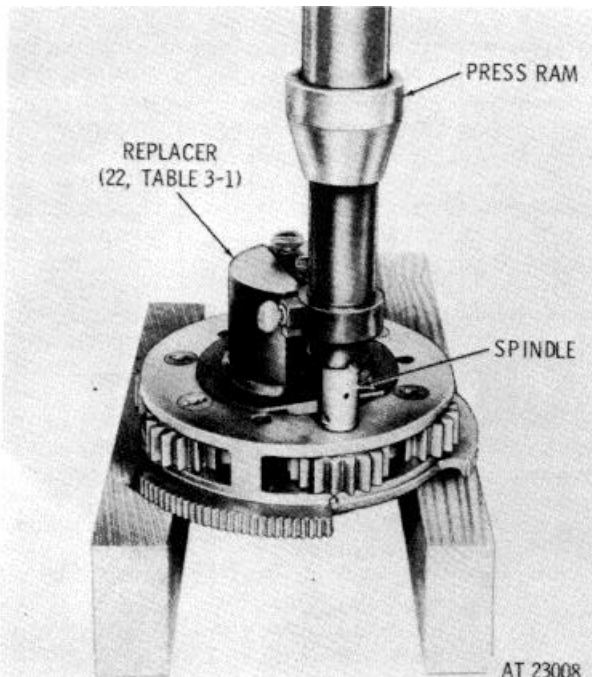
Installing spindle into reverse-range planetary carrier.
